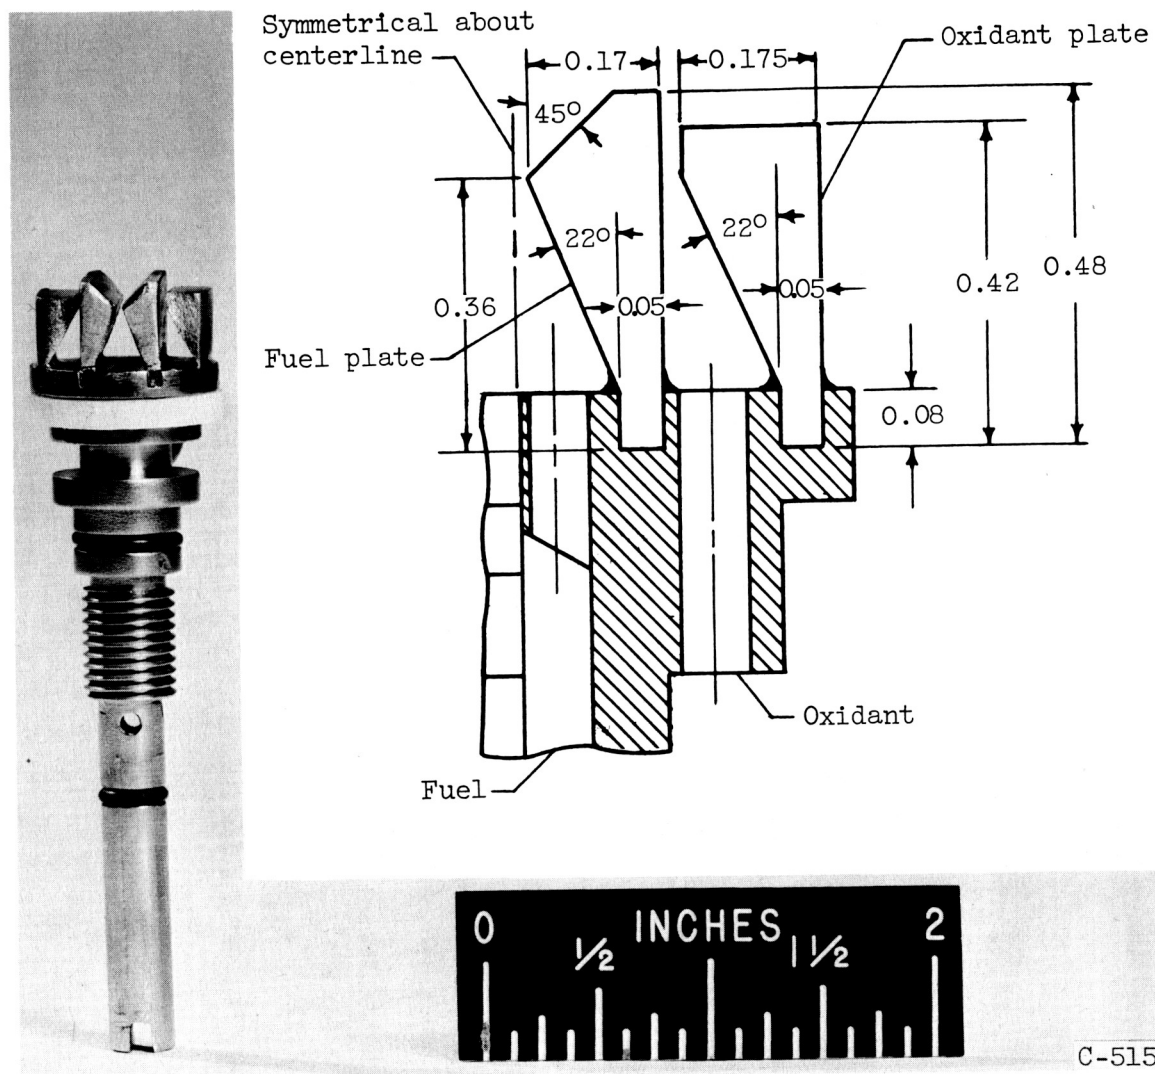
Parallel-sheet element (dimensions in inches except where noted).
